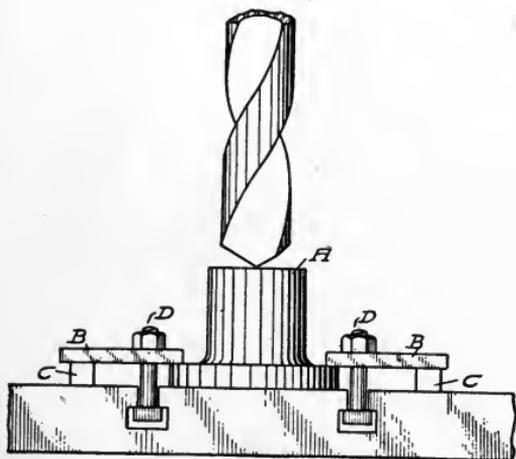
Work Clamped to Table by Straps for Accurate Hole-Drilling
